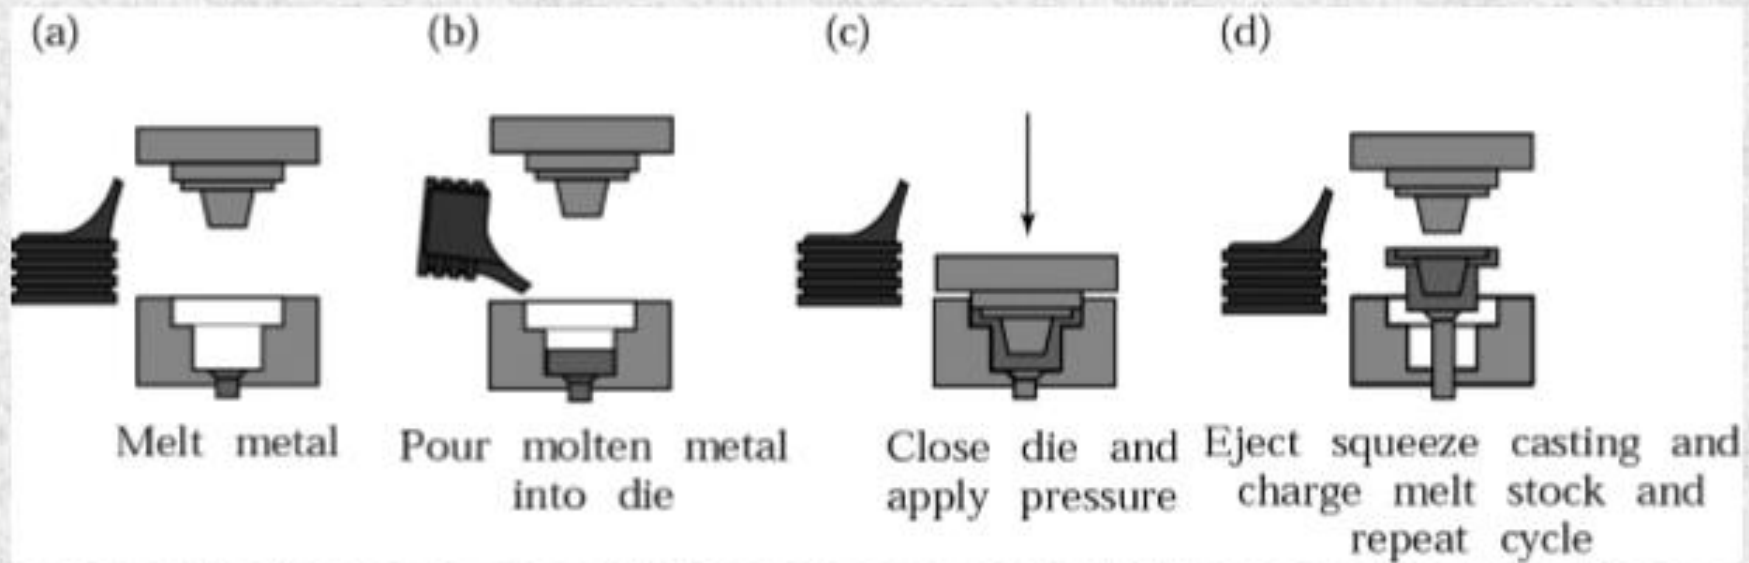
Sequence of operations in the squeeze-casting process. This process combines the advantages of casting and forging.
